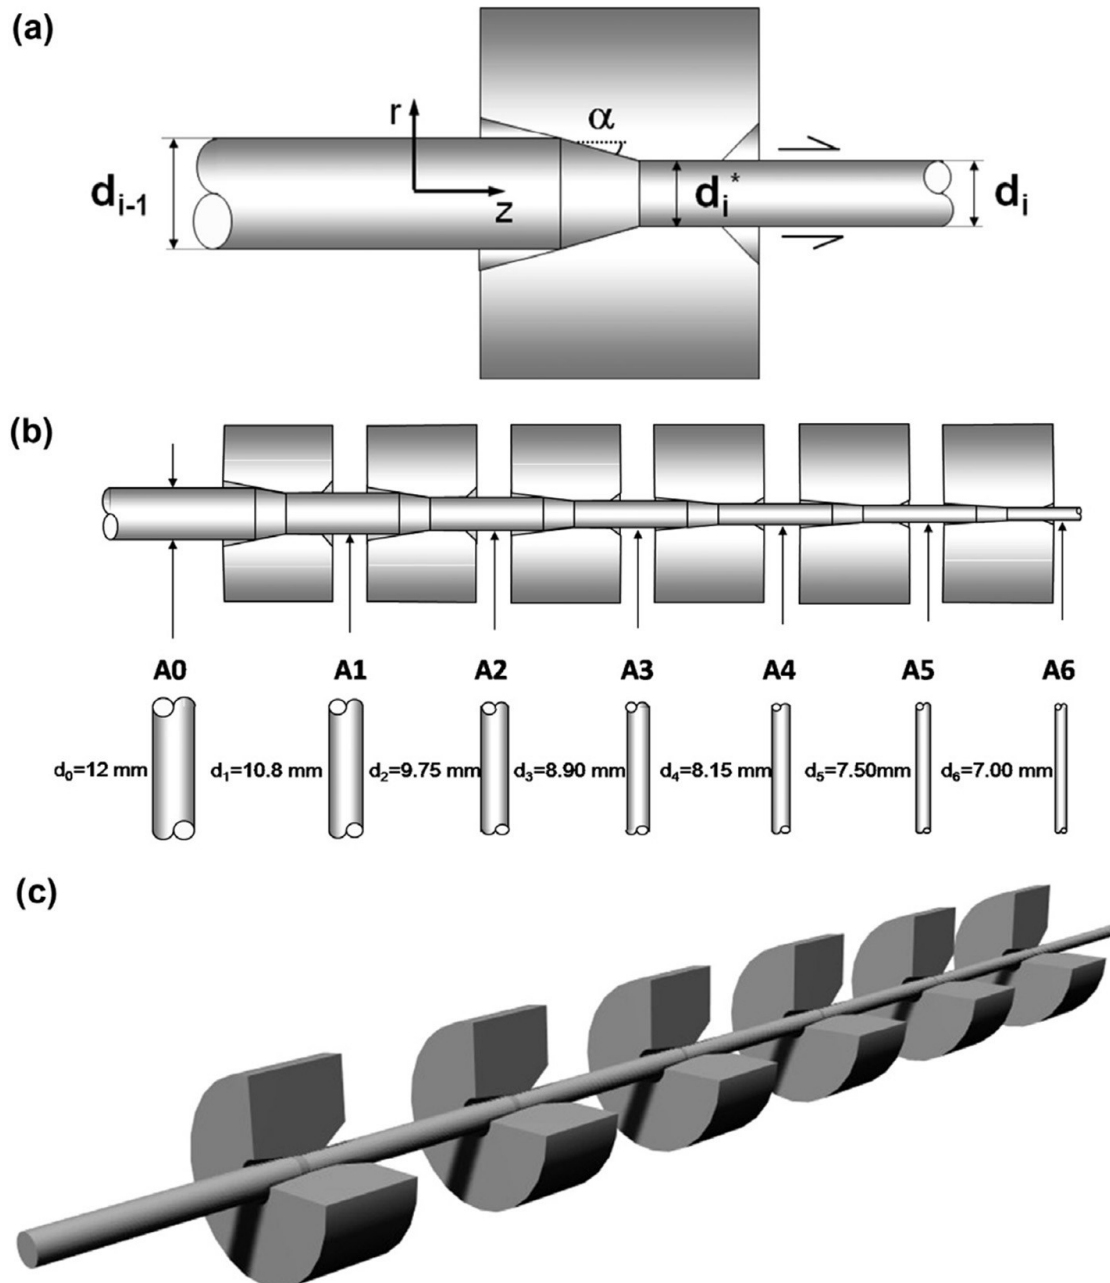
Scheme of the cold drawing process: (a) cold drawing in one pass of the steel through the die, (b) progressive cold drawing in six passes, (c) scheme of the whole chain of manufacturing. [122]
